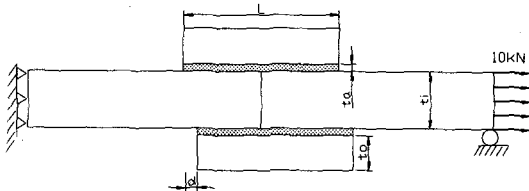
Configurations and dimension of double-lap joint with an end mismatch
